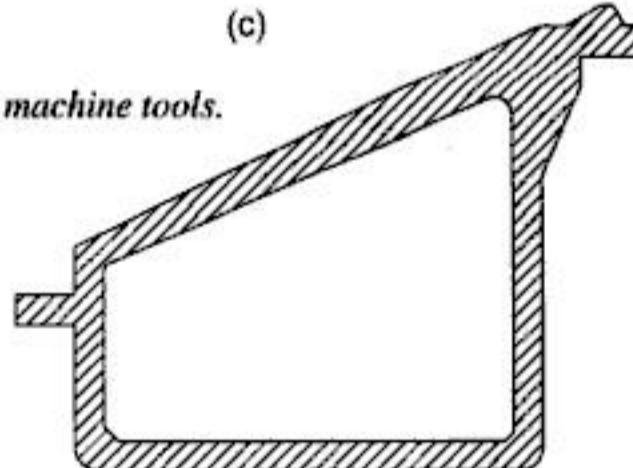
Typical slant bed construction used in lathes for easy disposal of chips.
